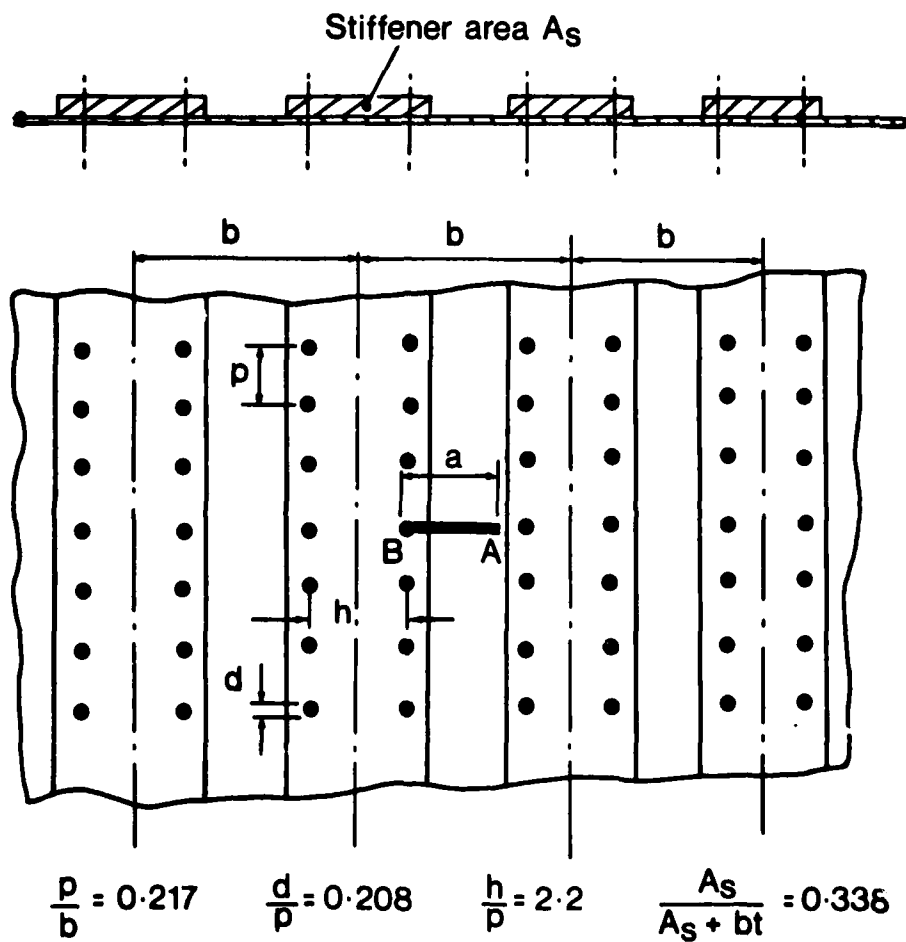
Cracked stiffened panel with tip B fixed at a rivet hole
